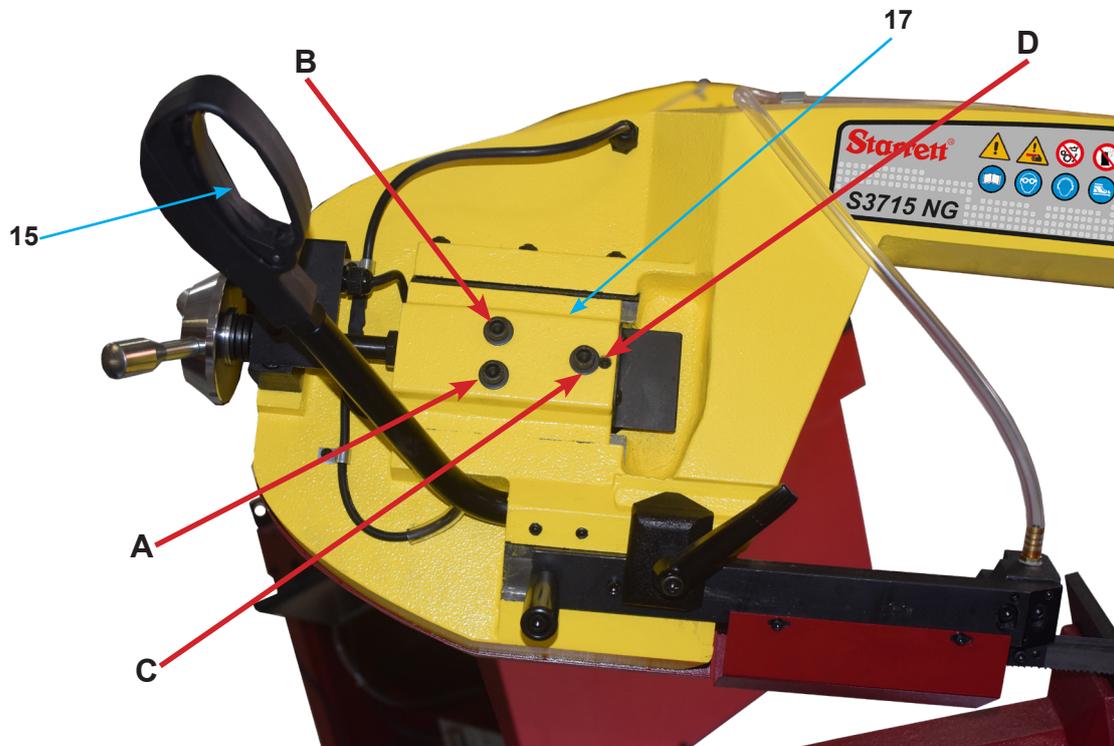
POSITIONING OF THE CAMBER ADJUSTMENT SCREWS
